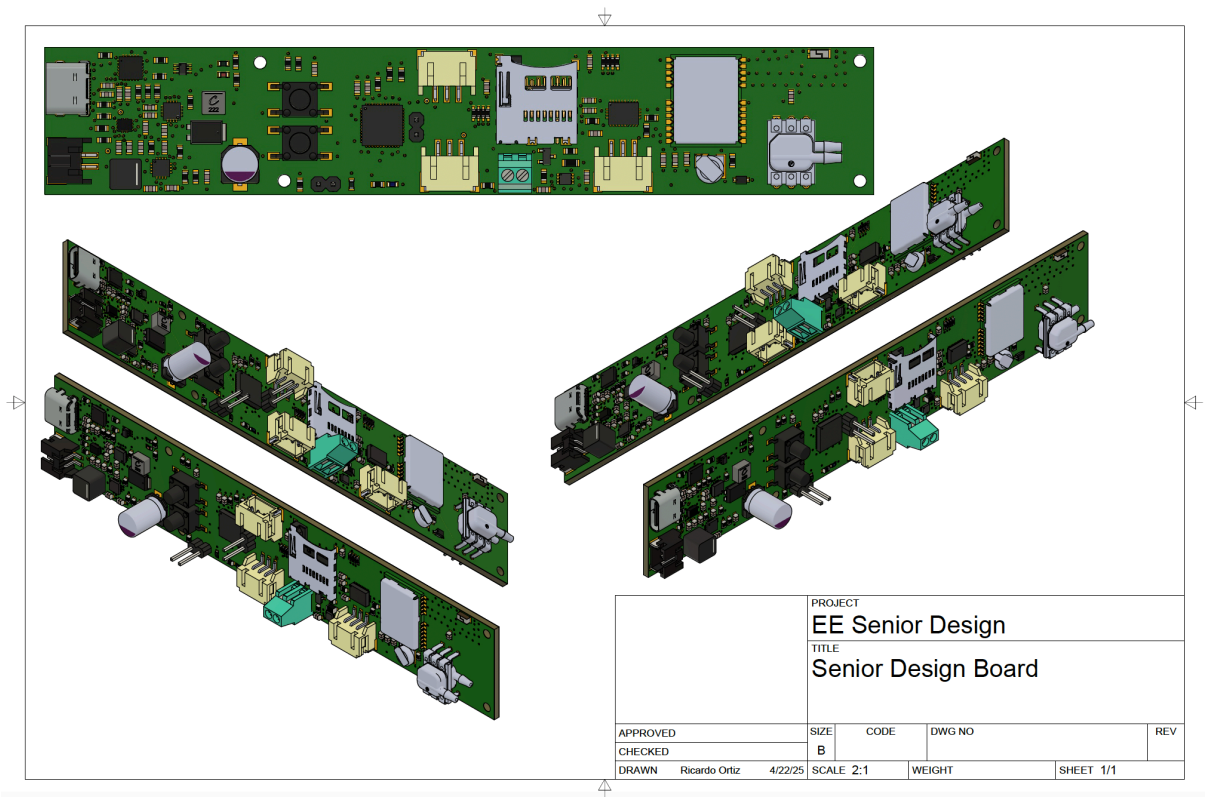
Circuit Board CAD Drawing (Multiple Views)
